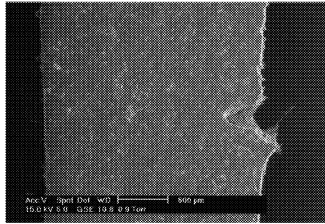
Fatigue crack initiated at the edge of the specimen from a defect created by the cutting process [22]
